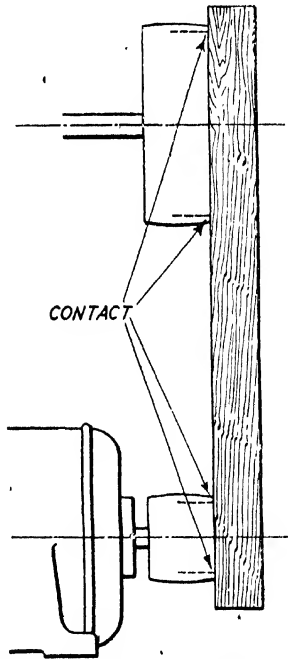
ALIGNING PULLEYS—STRAIGHTEDGE METHOD
